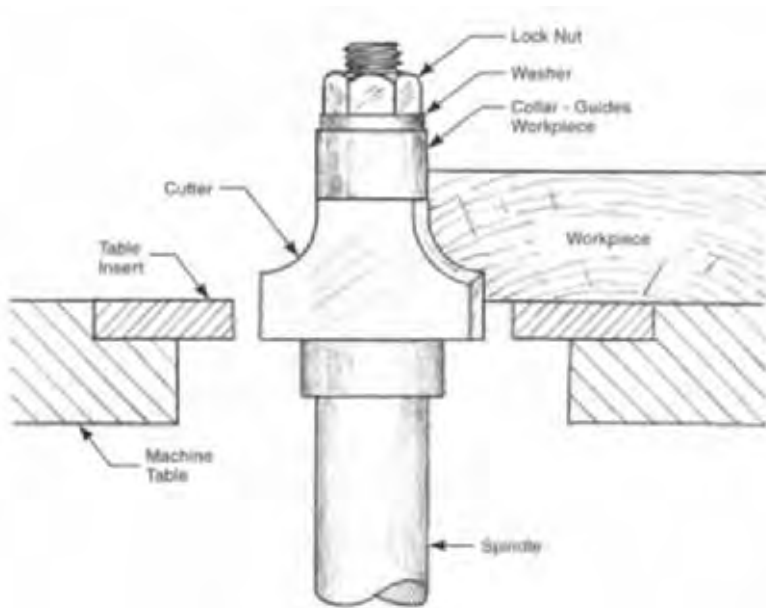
B6-1 A typical router cutter with a collar to guide the cutter along the edge of the workpiece. The collar may alternatively bear against a template instead of the workpiece.
